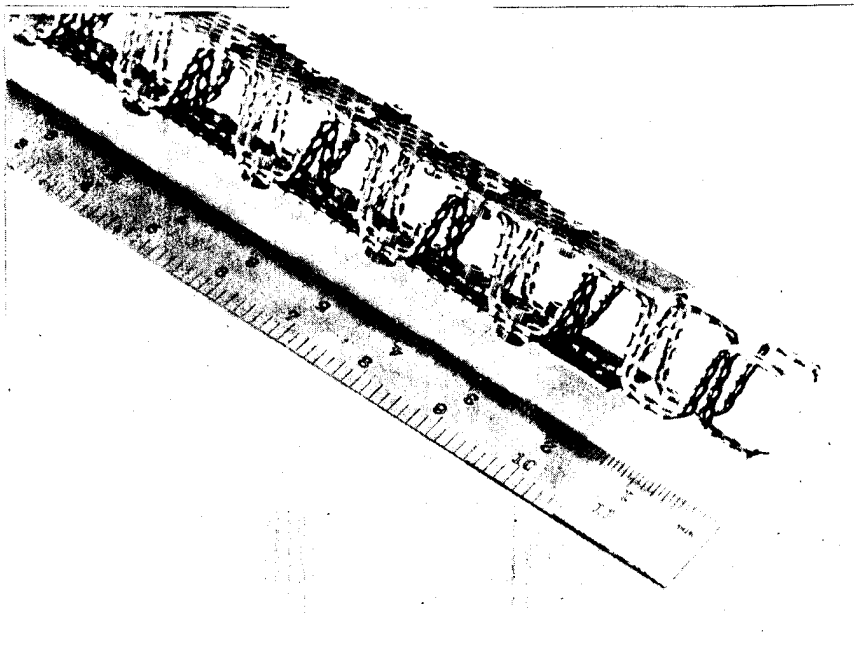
Partial view of the aluminum offset-corrugated sandwich with face-sheets partly removed.
